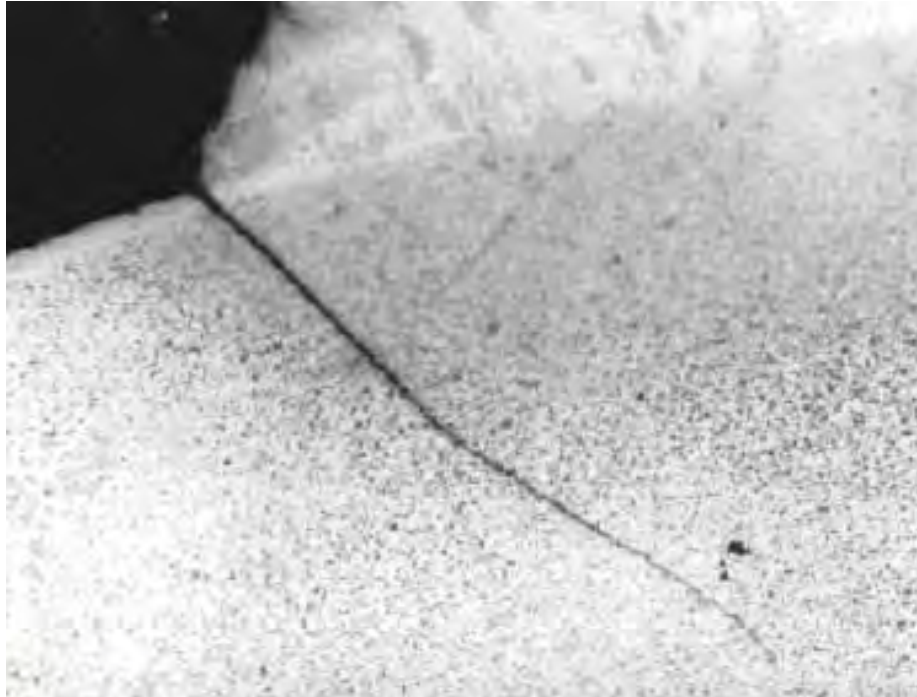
Metallographic section through a thermal fatigue crack in a carbon steel sample indicates origin at the toe of an attachment weld. Magnification 50X, etched.
